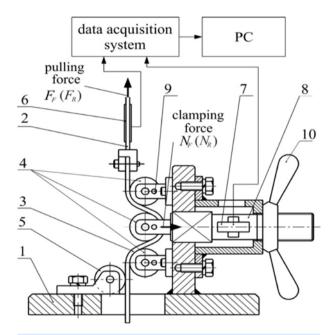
Cross-section of a drawbead simulator: 1 – frame; 2 – upper tension member; 3 – specimen; 4 – working rollers; 5 – support roller; 6 and 7 – load cells; 8 – horizontal tension member; 9 – pin; 10 – wing nut
